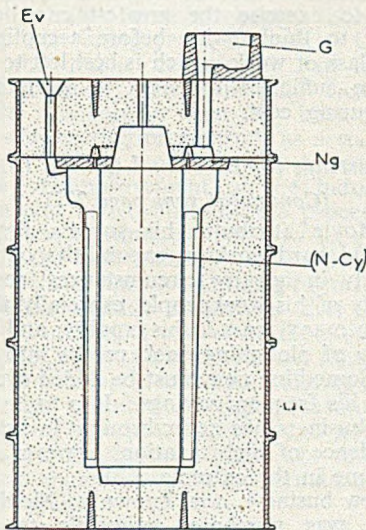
Method employed for the Top Pouring of a Cylinder Casing, using Pencil Runners.
